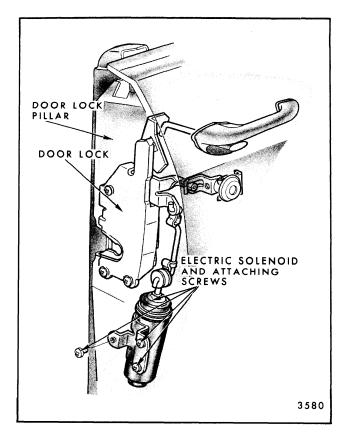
Front Door Lock Electric Solenoid Installation
